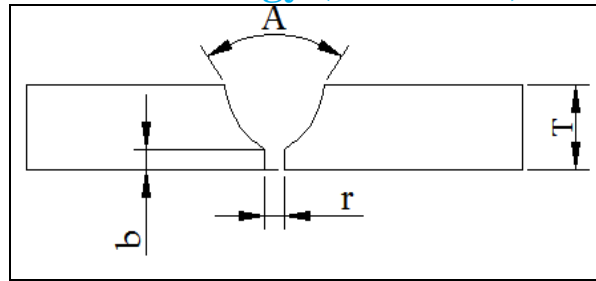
U Groove Geometry dimensions as per standard of ASTM
